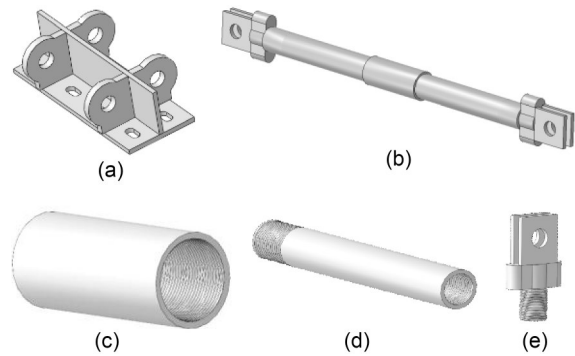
Details of the ARS components: (a) connection part; (b) connecting rod; (c) sleeve part; (d) rod part; (e) joint part
